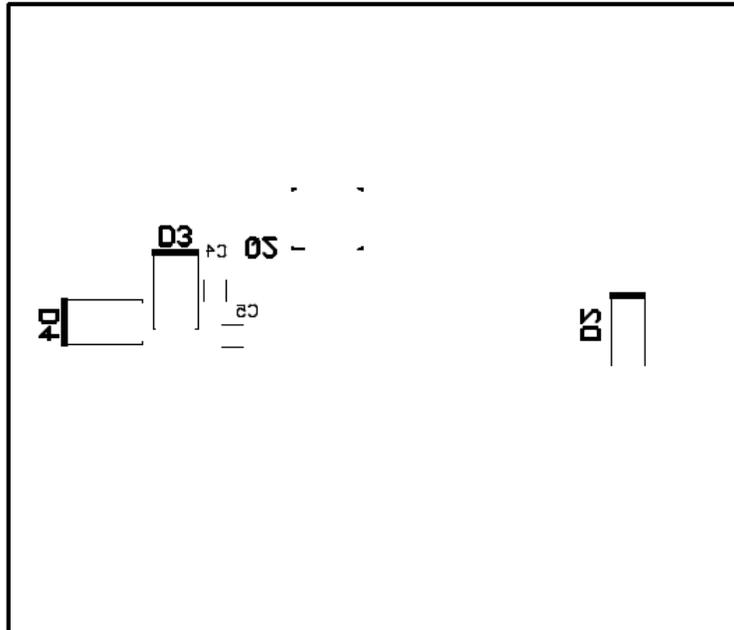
LM74700DDFEVM Bottom Side Placement
